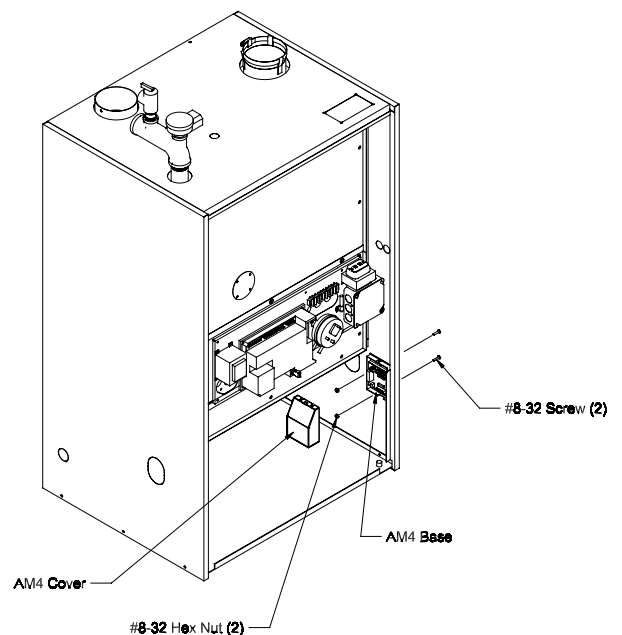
AM4 Mounting Hole Location For BWC150/225
